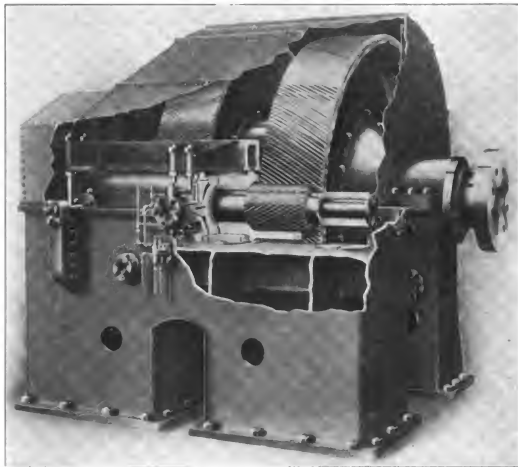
PART SECTIONAL VIEW OF WESTINGHOUSE TURBINE REDUCTION GEAR INSTALLED ON THE U. S. COLLIER REPTUNE.
